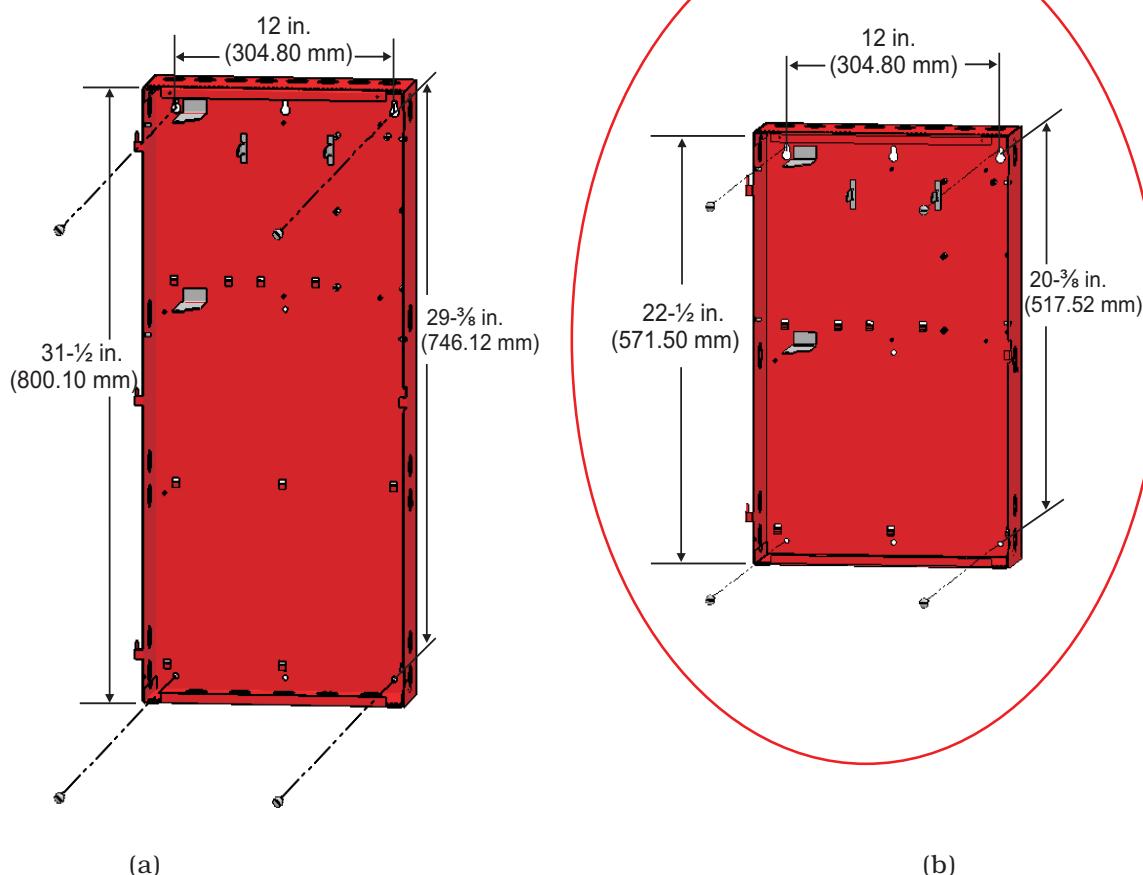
Mounting Dimensions for 3-Tiered (a) and 2-Tiered (b) Main and Expansion Enclosures
